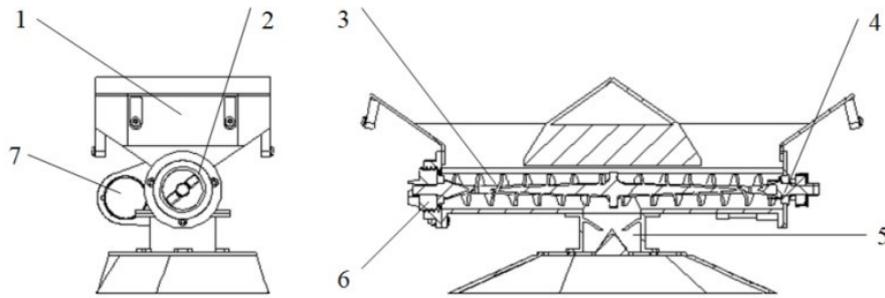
Structural schematic of seedmeter unit. 1 - Seedmeter pipe; 2 - Flange nut; 3 - Main shaft of double-screw conveyor; 4 - Small shaft; 5 - Seed hopper; 6 - Bolt; 7 - Geared motor.
